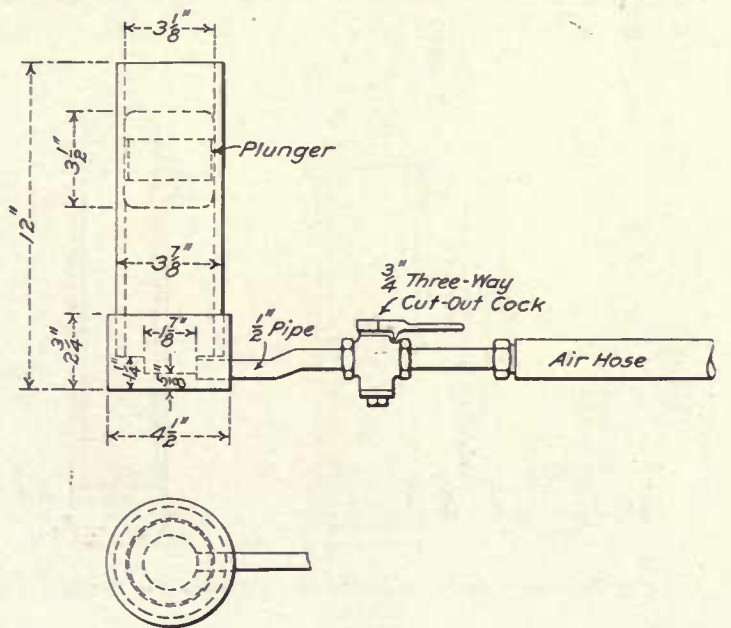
Pneumatic Hammer for Driving Out Bolts.
